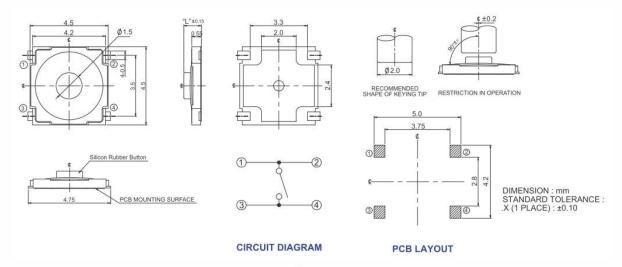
223BM2VB..., Surface Mount Gull Wing Type 2, With Button
